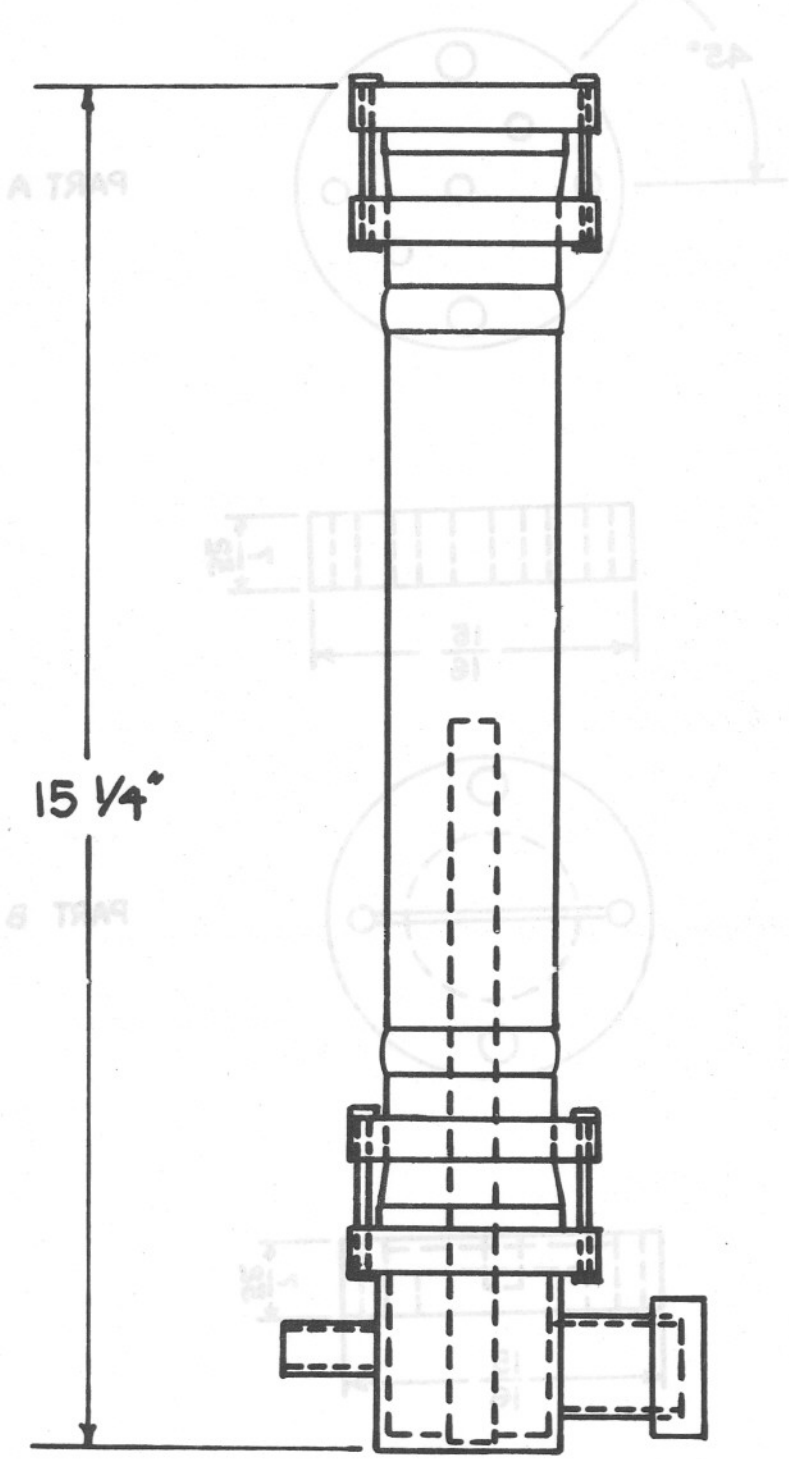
High temperature dielectric measuring setup - vacuum housing assembly.
